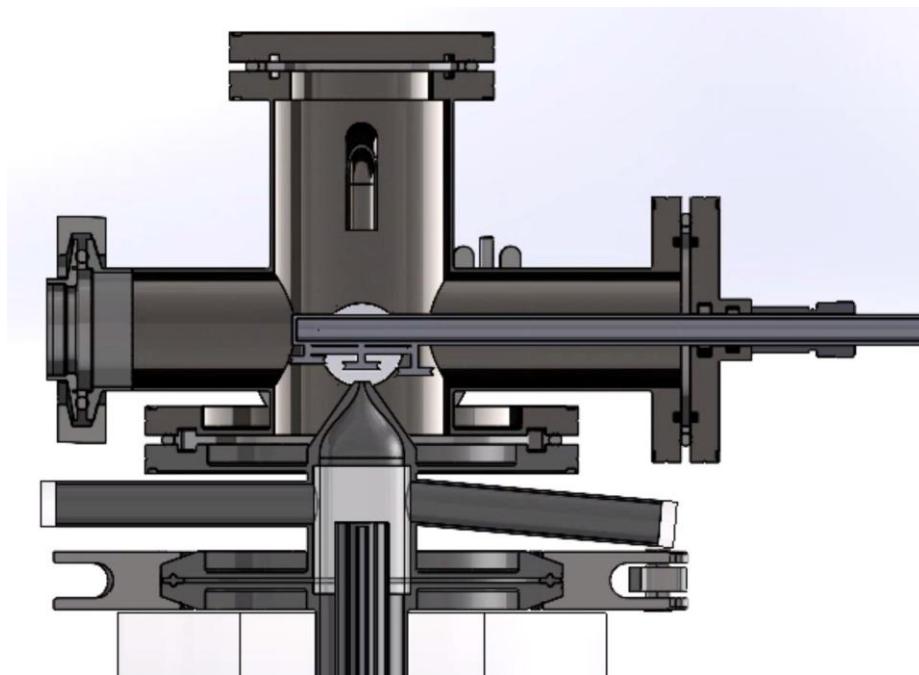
3D model cross section of the FLAME system with nozzle section and vacuum chamber.
